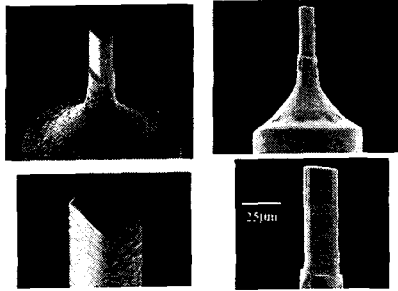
Tungsten carbide micro-end mills miniature machining [1]
